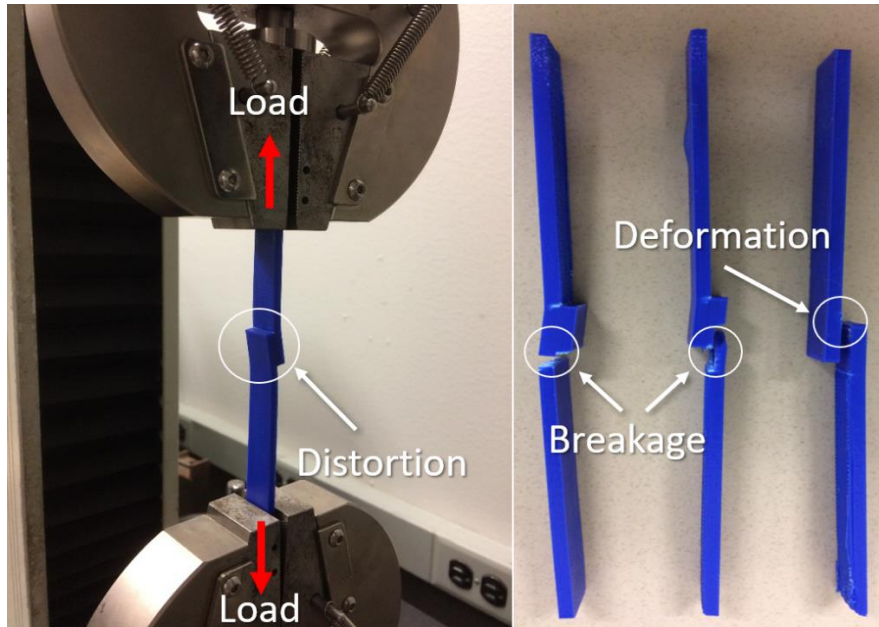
ASTM D3163 bonding test on FFF-printed specimens
